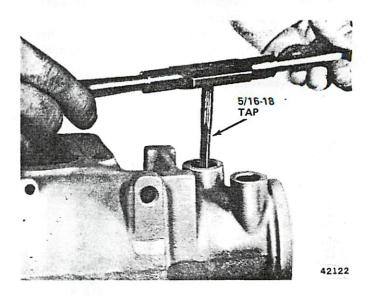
L-20 Threading Hose Connector Seats (Gears with Non-Metric Fittings Only)
